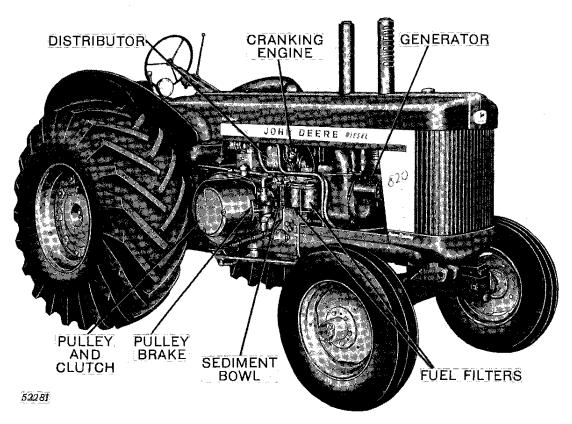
John Deere "820" Series Diesel Tractor-Pulley Side
